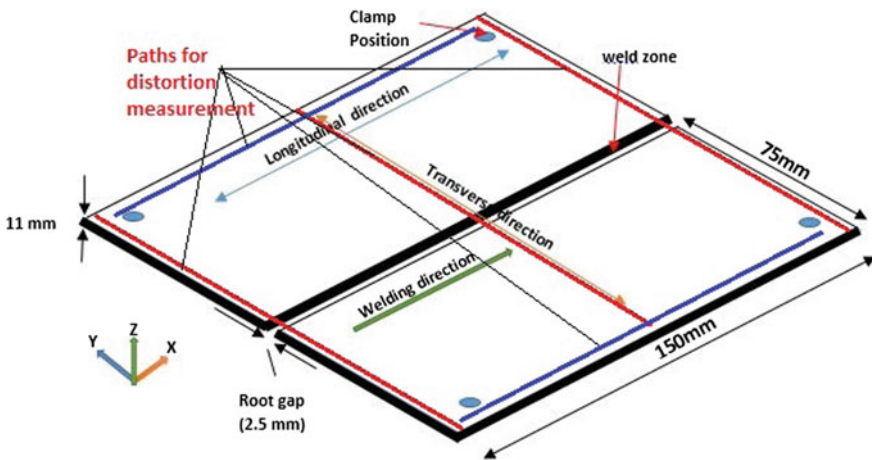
Schematic diagram of butt weld sample
